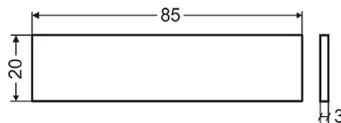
Shape and dimensions of specimens for fatigue resistance tests
